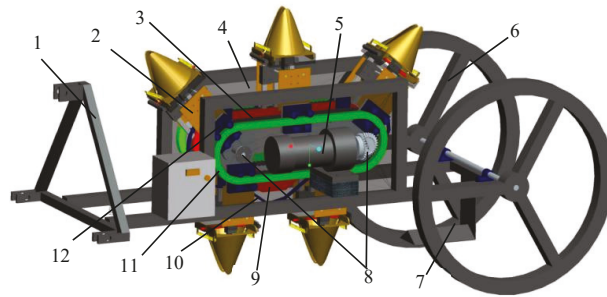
Structure diagram of reverse rotary soil-picking-type hole-forming device: 1—frame; 2—hole-forming mechanism; 3—chain and sprockets; 4—side plate; 5—motor; 6—ground wheel; 7—retaining plate; 8—transmission shaft; 9—hole-forming cam; 10—putter cam; 11—circular guide-way; 12—slider.
